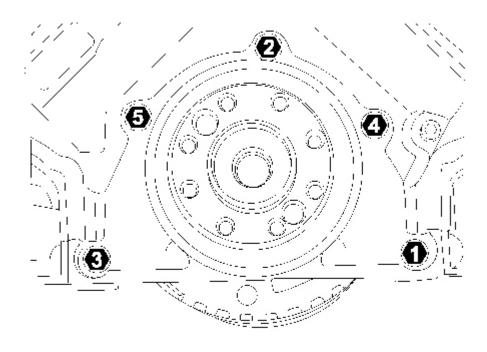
Rear Seal Retainer Torque Sequence Courtesy of CHRYSLER LLC
